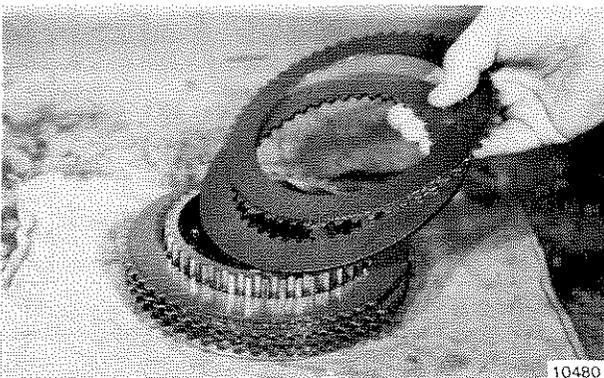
DISASSEMBLY OF THE CLUTCHES (Page 3 of 3)
